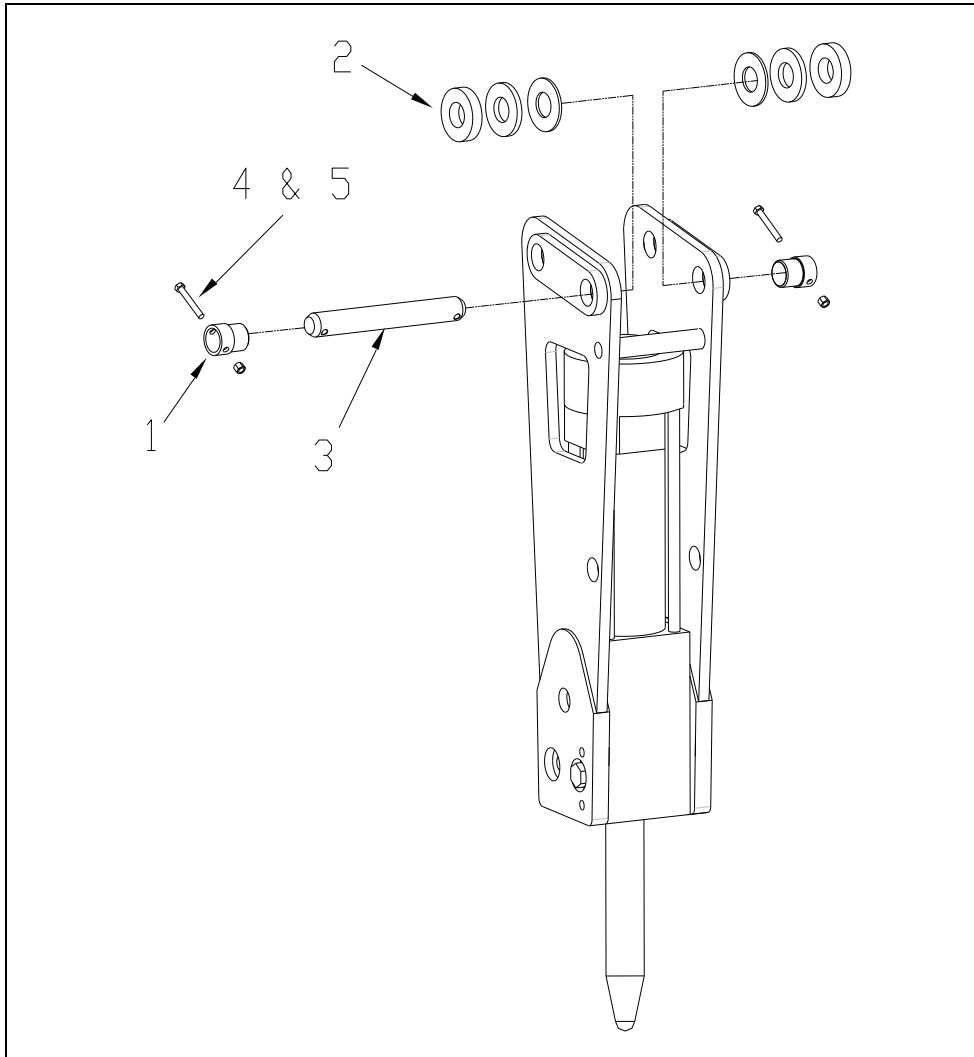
AR70 Series Mounting Kit for Housing Plate Type "XSF"
